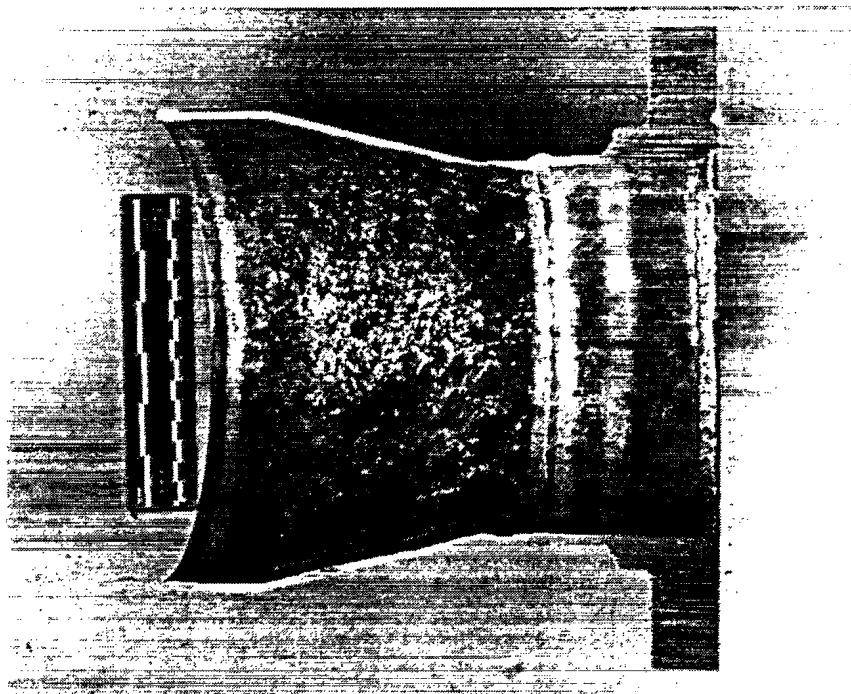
Cross-section of transition piece showing erosion corrosion downstream from a circumferential weld.
